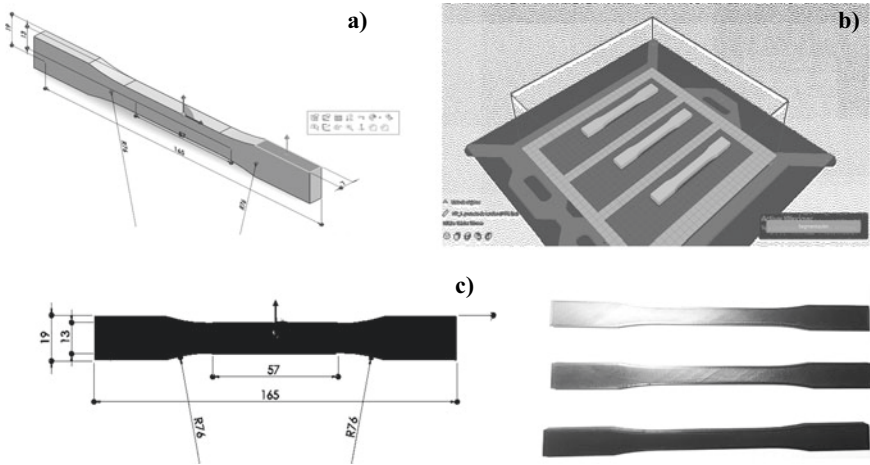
a Isometric view of the layout of tensile specimen according to ASTM D638—14 specifications, b manufacturing process in a 3D printing software. c tensile specimen made according to the specifications of the standard
